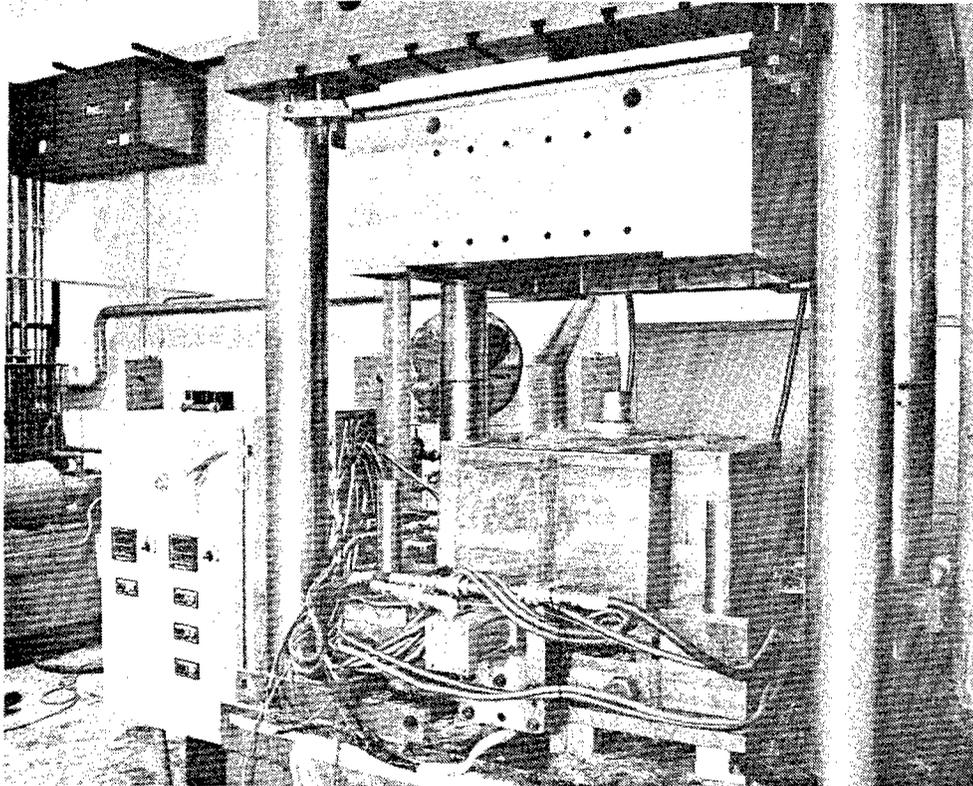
2. Complete Roadwheel Mold in 500 Ton Press
